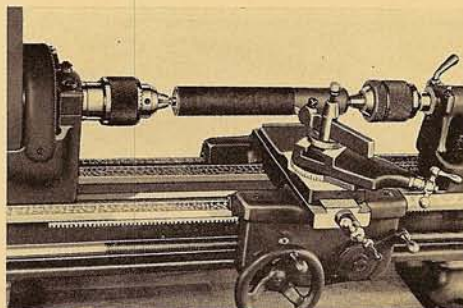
Truing a Typewriter Platen. Lathe Trues All Types of Rollers.
